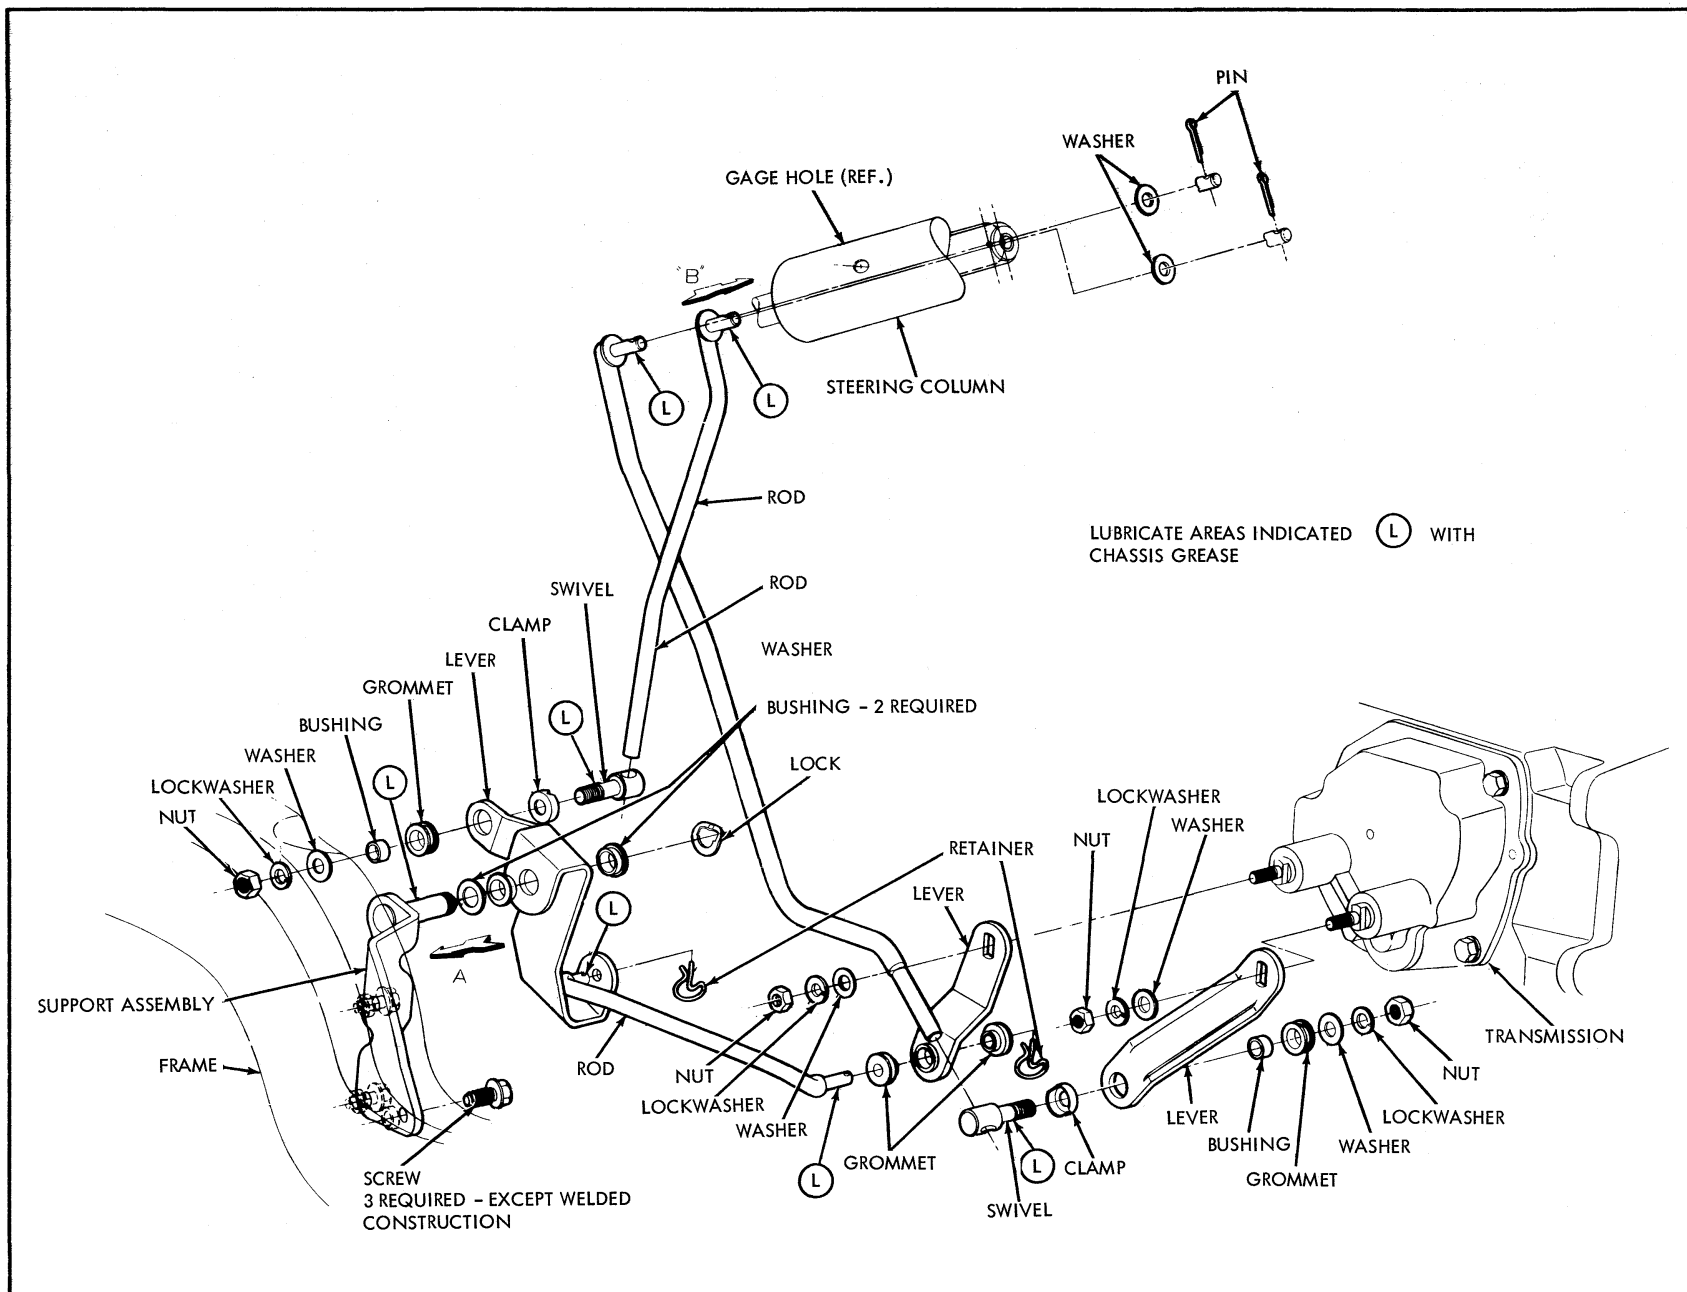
Gearshift Controls (Column) - 6 Cyl.
